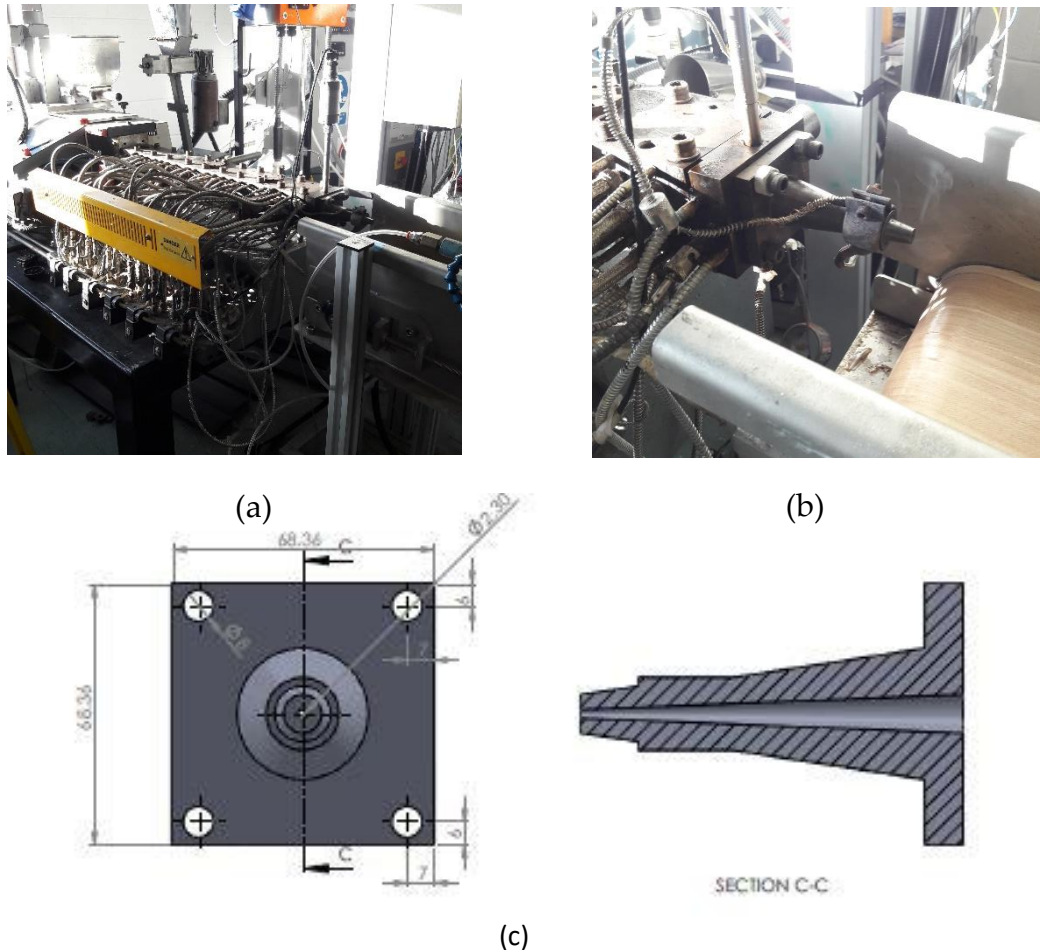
Depiction of machinery used for the fabrication of formulations described in this body of work: (a) twin-screw extruder, (b) mounted die attachment on extruder flange, (c) schematic of die attachment.
